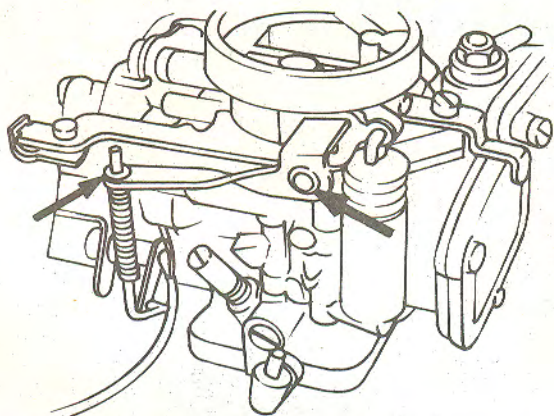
The arrow points to the retaining pin which secures the accelerator pump lever to the carburettor body.
